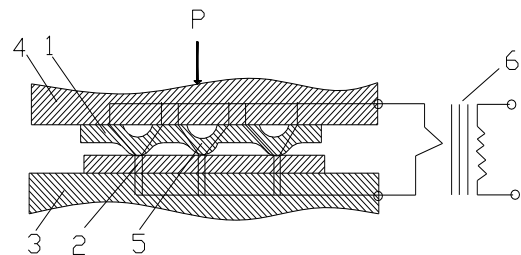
Schematic of resistance projection welding process: 1 - upper sample with projections; 2 - flat sample; 3 and 4 - lower and upper electrodes of the pressing device; 5 - projection made by cold deformation; 6 - power supply for welding
